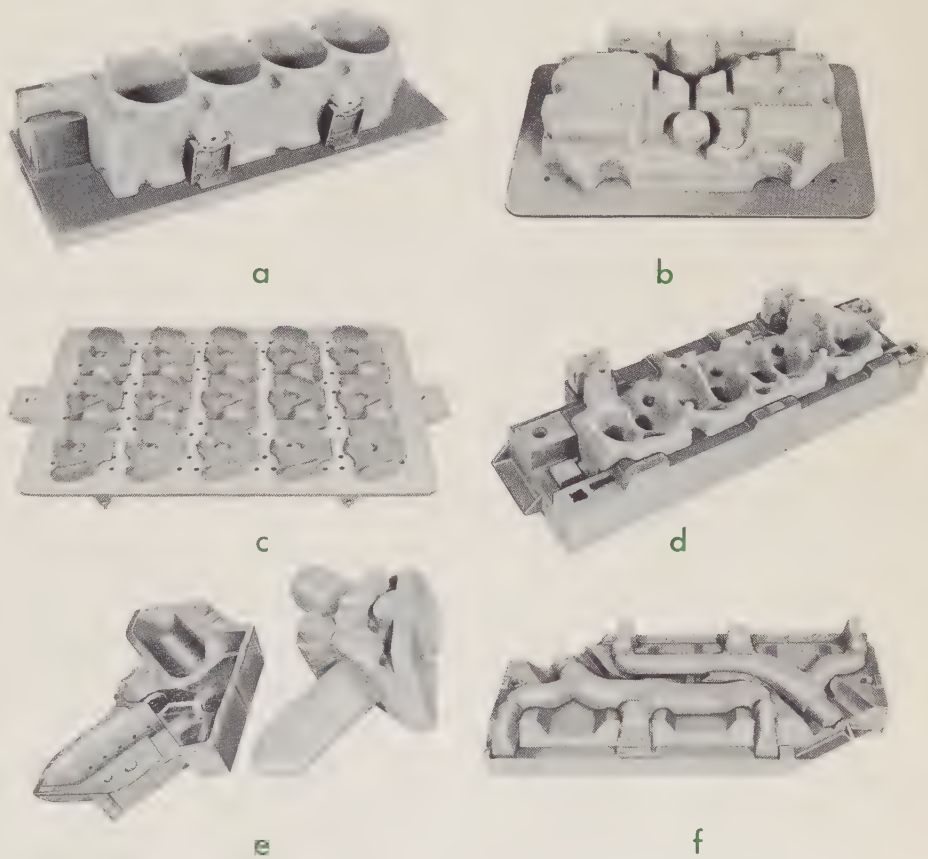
The cylinder block water-jacket core is baked on a flat-plate core drier with necessary projections to support overhanging core prints (a). A flat-plate core drier is used to bake the slab core which forms the rear of the cylinder block (b). Five sub-jacket, cylinder-head cores are dried on a single flat-plate core drier (c). The main water-jacket core of the cylinder head requires a specially designed core drier to support its complex surfaces (d). The combination crankcase and cylinder barrel core also requires a specially designed core drier (e). Two exhaust-mainfold cores are dried simultaneously on a common drier (f). Most core driers have holes in their lower surfaces to aid in the convection of heat to the cores.
